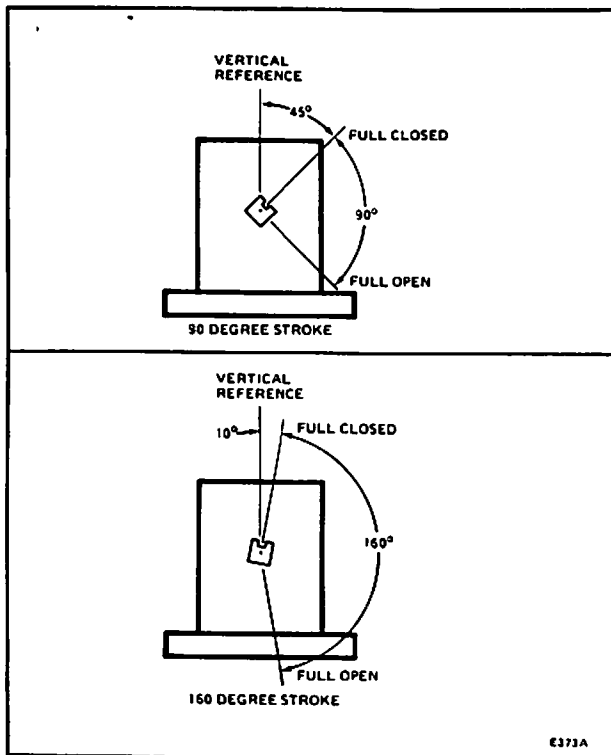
LIMITS OF CRANK ARM ROTATION FOR M744S,T.
